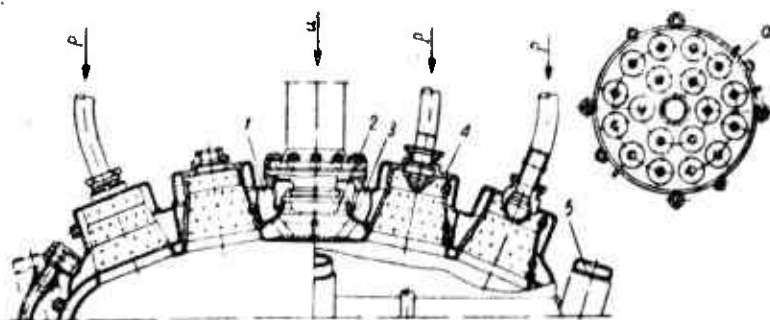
Spherical head with antechambers: a) emplacement of antechambers on the head; 1) upper fuel manifold; 2) fuel port; 3) lower fuel manifold; 4) antechamber; 5) thrust transmitting bracket; u) oxidizer; p) fuel.
